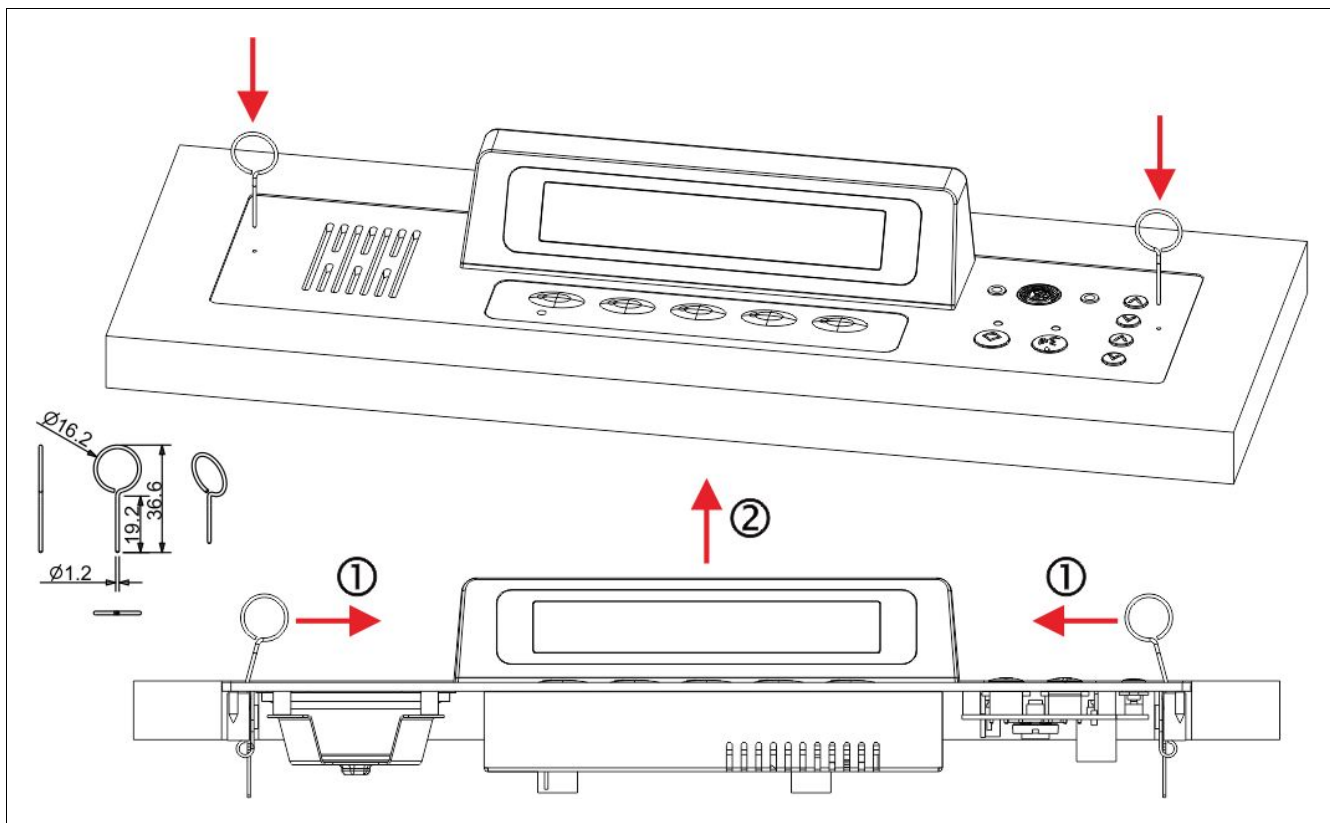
Disassembly of HCS-48U9 series flush-mounted congress unit (method a)
